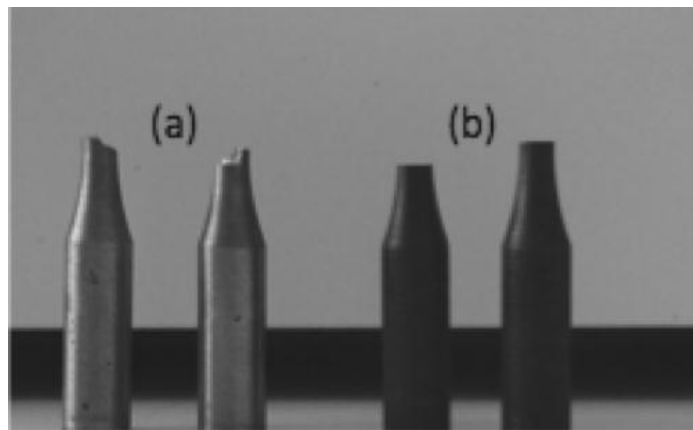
Fractured AISI 4130 Fatigue Specimens: (a) non-treated (b) carburized
